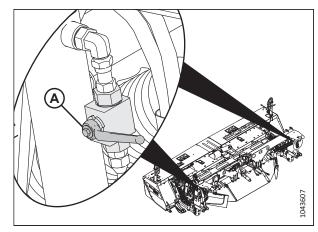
Cylinder Lock-Out Valve - Closed Position
